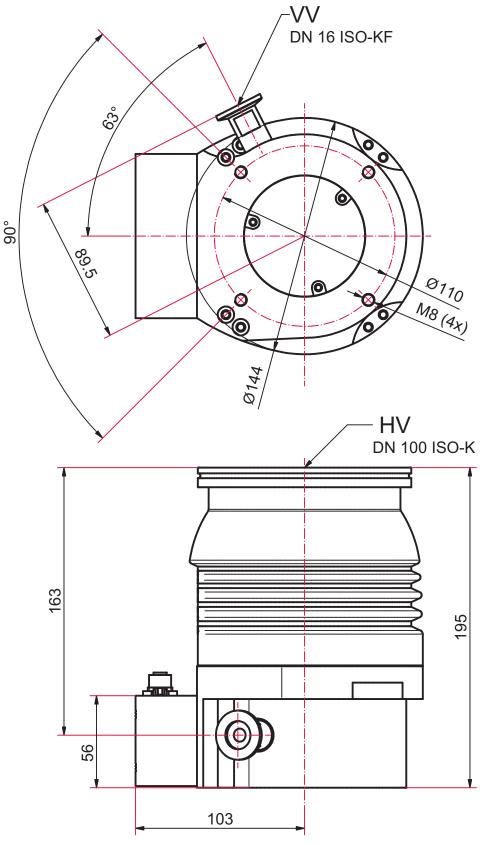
Dimensions HiPace 300 | PM P04 090 C Dimensions in mm
